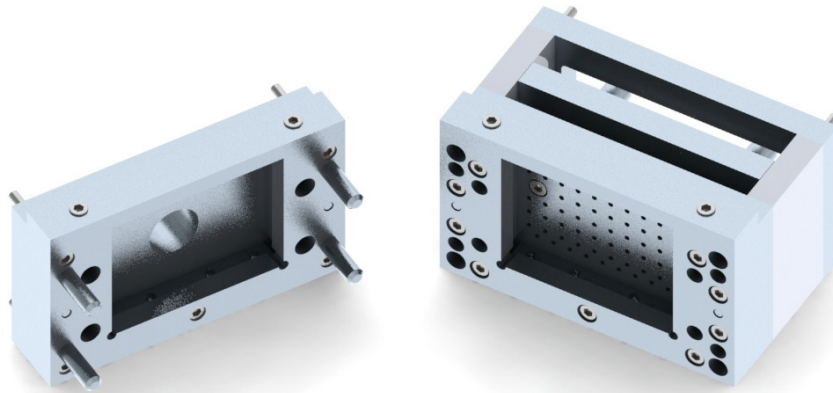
A Master Unit Die will allow for quick changeovers of 3D Printed Moulds and overall reduce the cost and lead time of mould manufacturing
